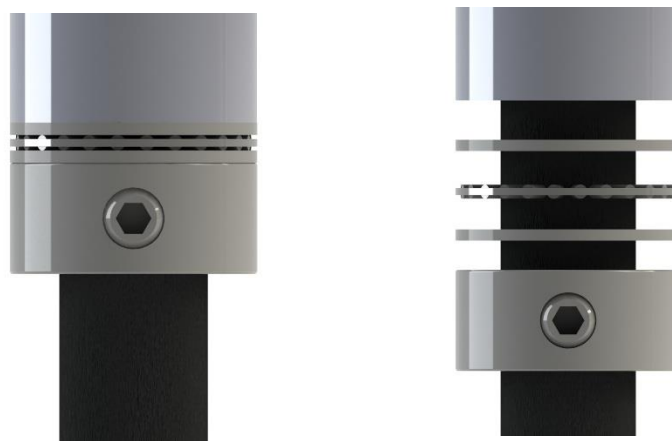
Thrust Bearing and Adjoining Clamping Collar
